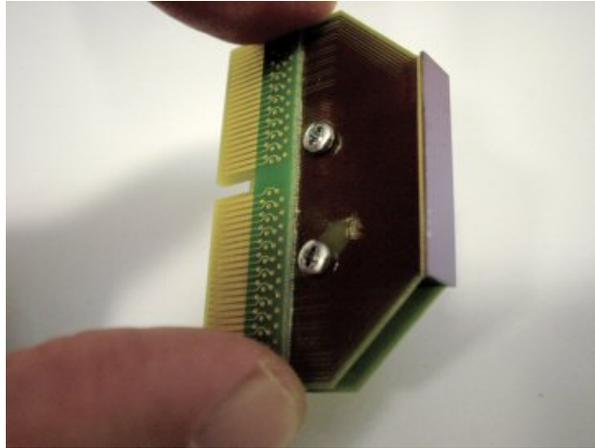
cMUT transducer soldered to a rigid PCB circuit
